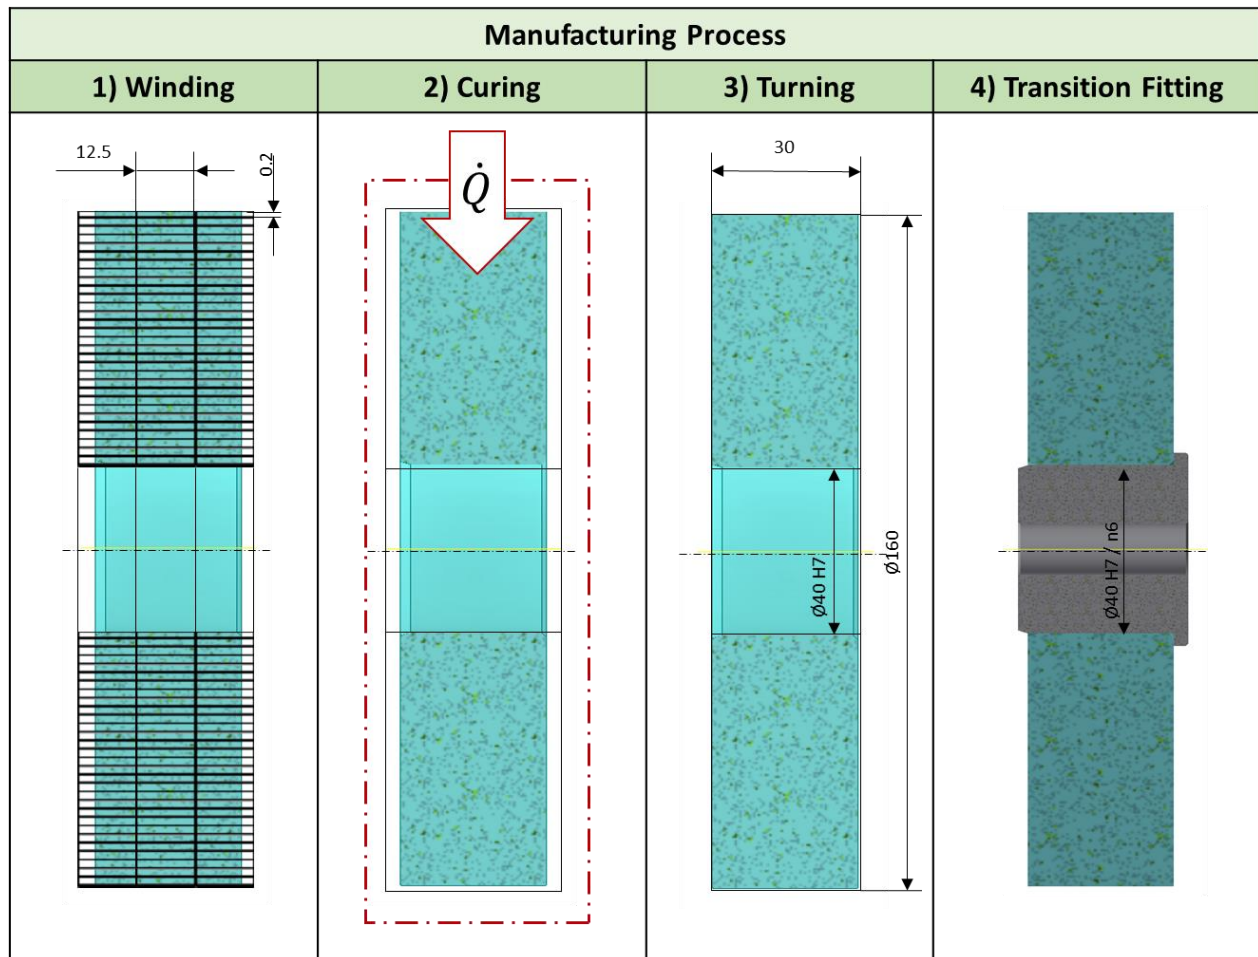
Manufacturing steps and dimensions of the unnotched burst rotor
